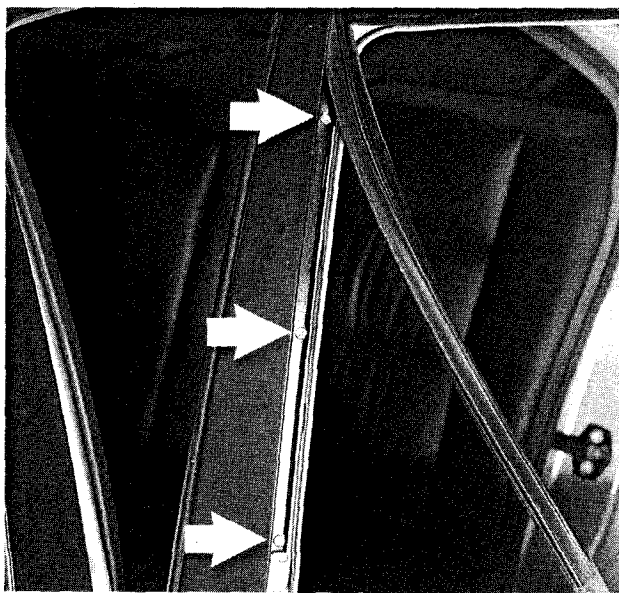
Trim cover mounting screws (arrows). To remove cover, slide up and off door.
